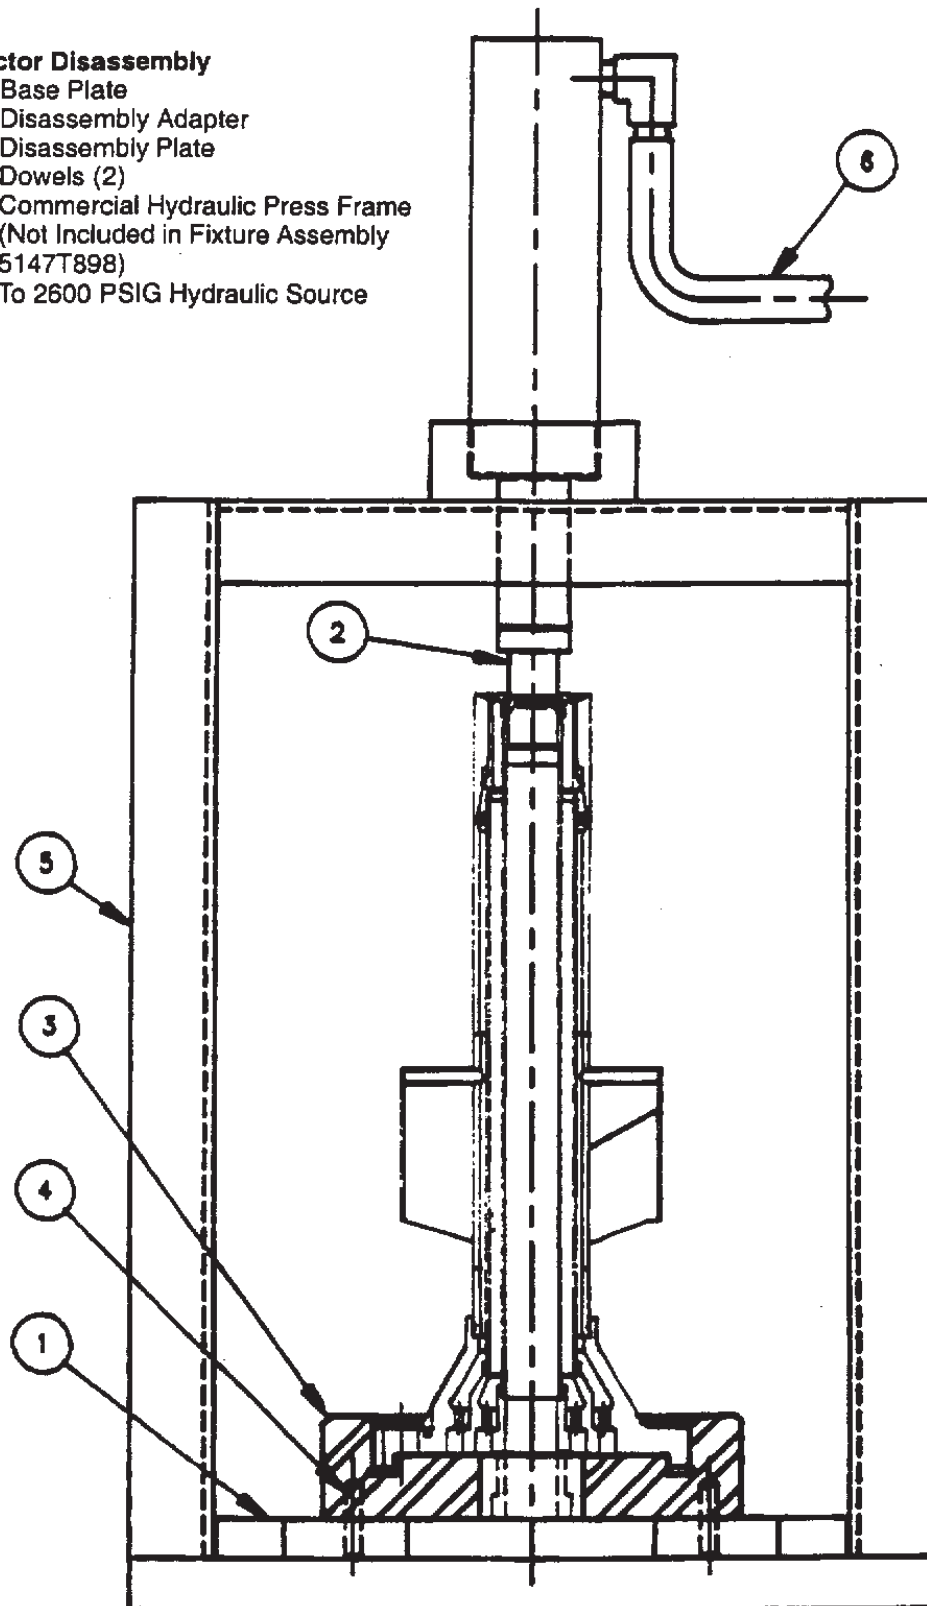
A Gas Fuel Injector Disassembly Using Fixture 514T898
